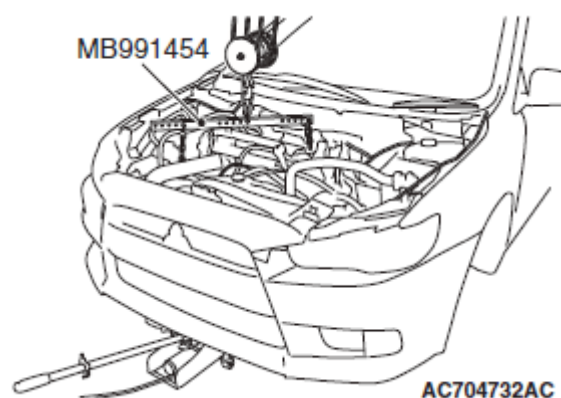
Holding Engine Assembly With Chain Block Using Special Tool MB991454
